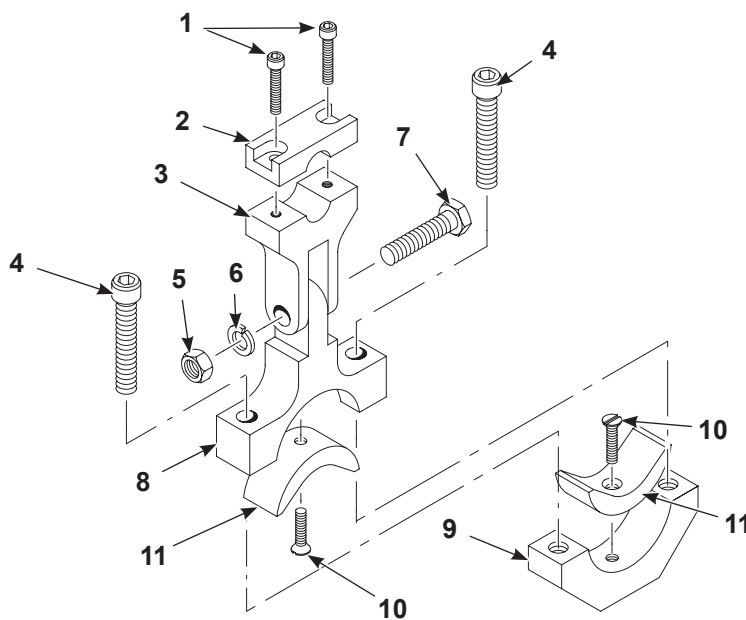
Adjustable Bracket Assembly for Extension Assemblies
